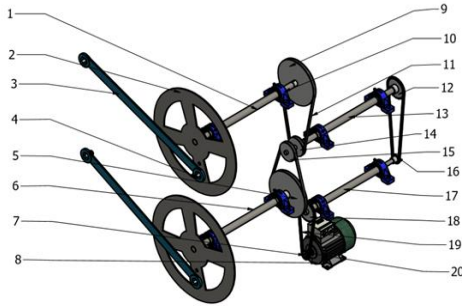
Transmission circuit of components of the machine. (Note: The Transmission Components are shown as follows: 1. Shaft 5 ; 2. Transmission Plate; 3. Power shaft; 4. Pin; 5. Pulley 3; 6. Shaft 4; 7. Gear 1; 8. Dynamo; 9. Pulley 4; 10. Bearing; 11. Belt; 12. Gear 4; 13. Shaft 3; 14. Pulley 1; 15. Pulley 2; 16. Gear 3; 17. Shaft 2; 18. Gear 2; 19. Chain; 20. Shaft).
